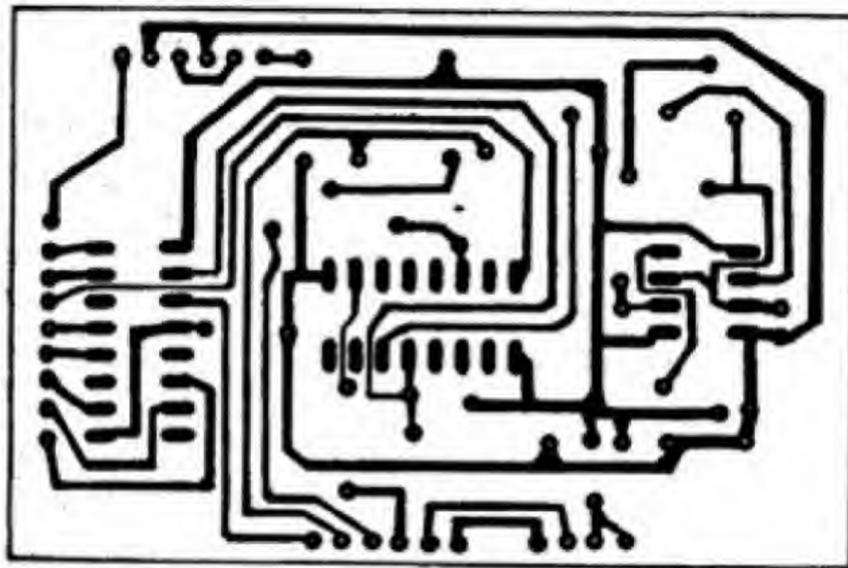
PCB layout for the circuit shown in Fig. 1.
